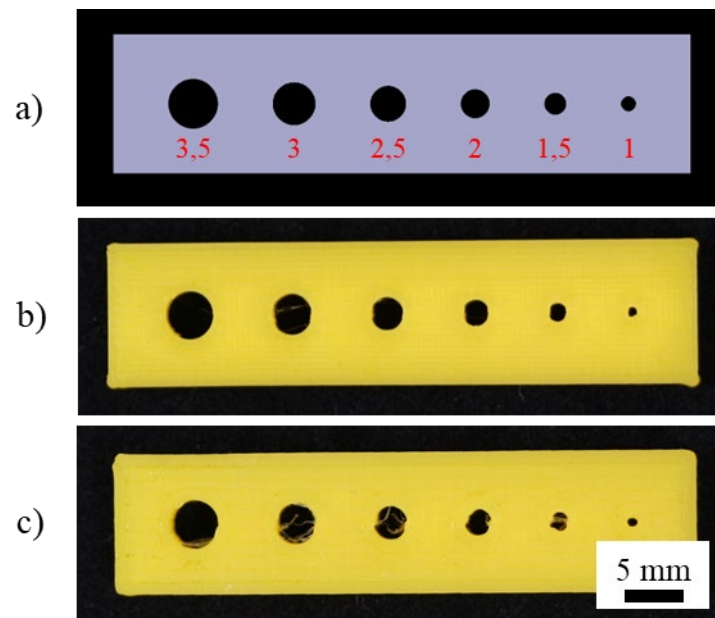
Reference CAD model of the targeted diameter holes and the 3d printed specimens a) Reference CAD model of the targeted diameter holes to compare to the performance of the printed holes, with the diameter of the printed holes indicated in mm b) Specimen printed in PLA with a nozzle having a diameter of 0.4 mm, c) specimen printed in PLA with a nozzle having a diameter of 0.8 mm.
